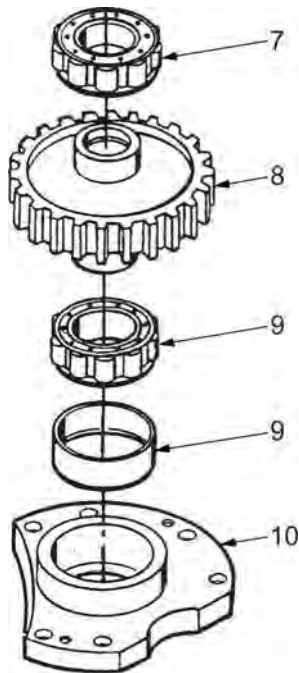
Hydrostatic Pump Idler Gear and Bearing Retaining Plate Bearings Removal.
